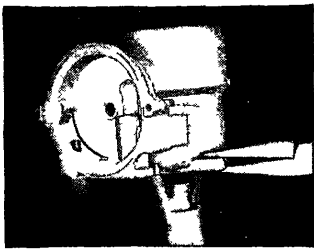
Remove all parts from air horn. Do not remove piston housing attached to air horn with rivet
